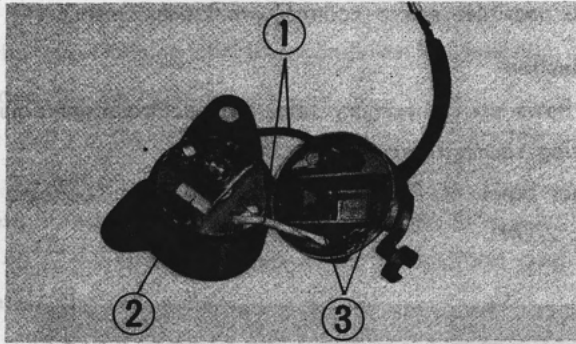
Disassembly of magnetic switch (cap is opened)
